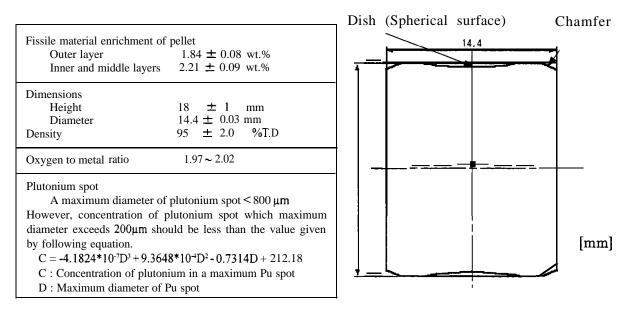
A cut view of FUGEN fuel pellet with its specification.
